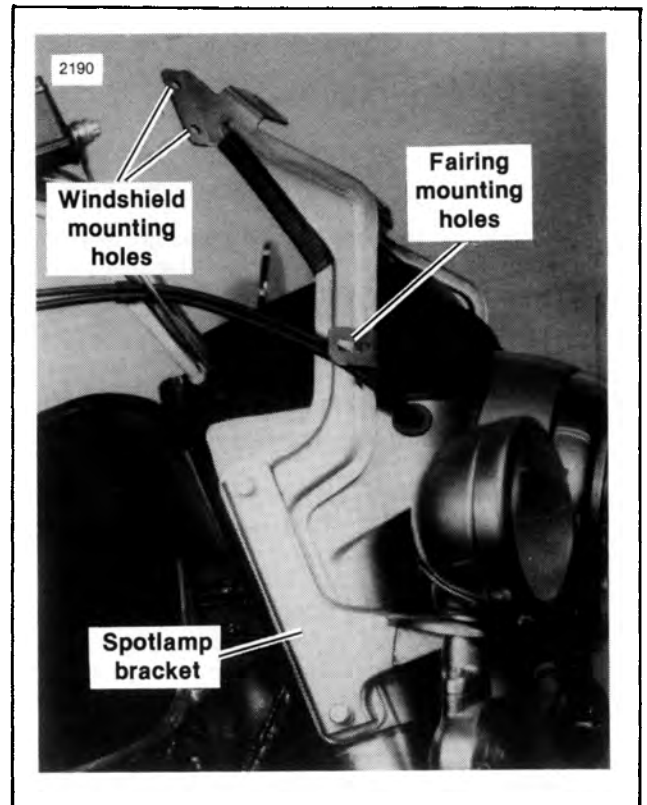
Windshield and Fairing Mounting Brackets — FLHT
